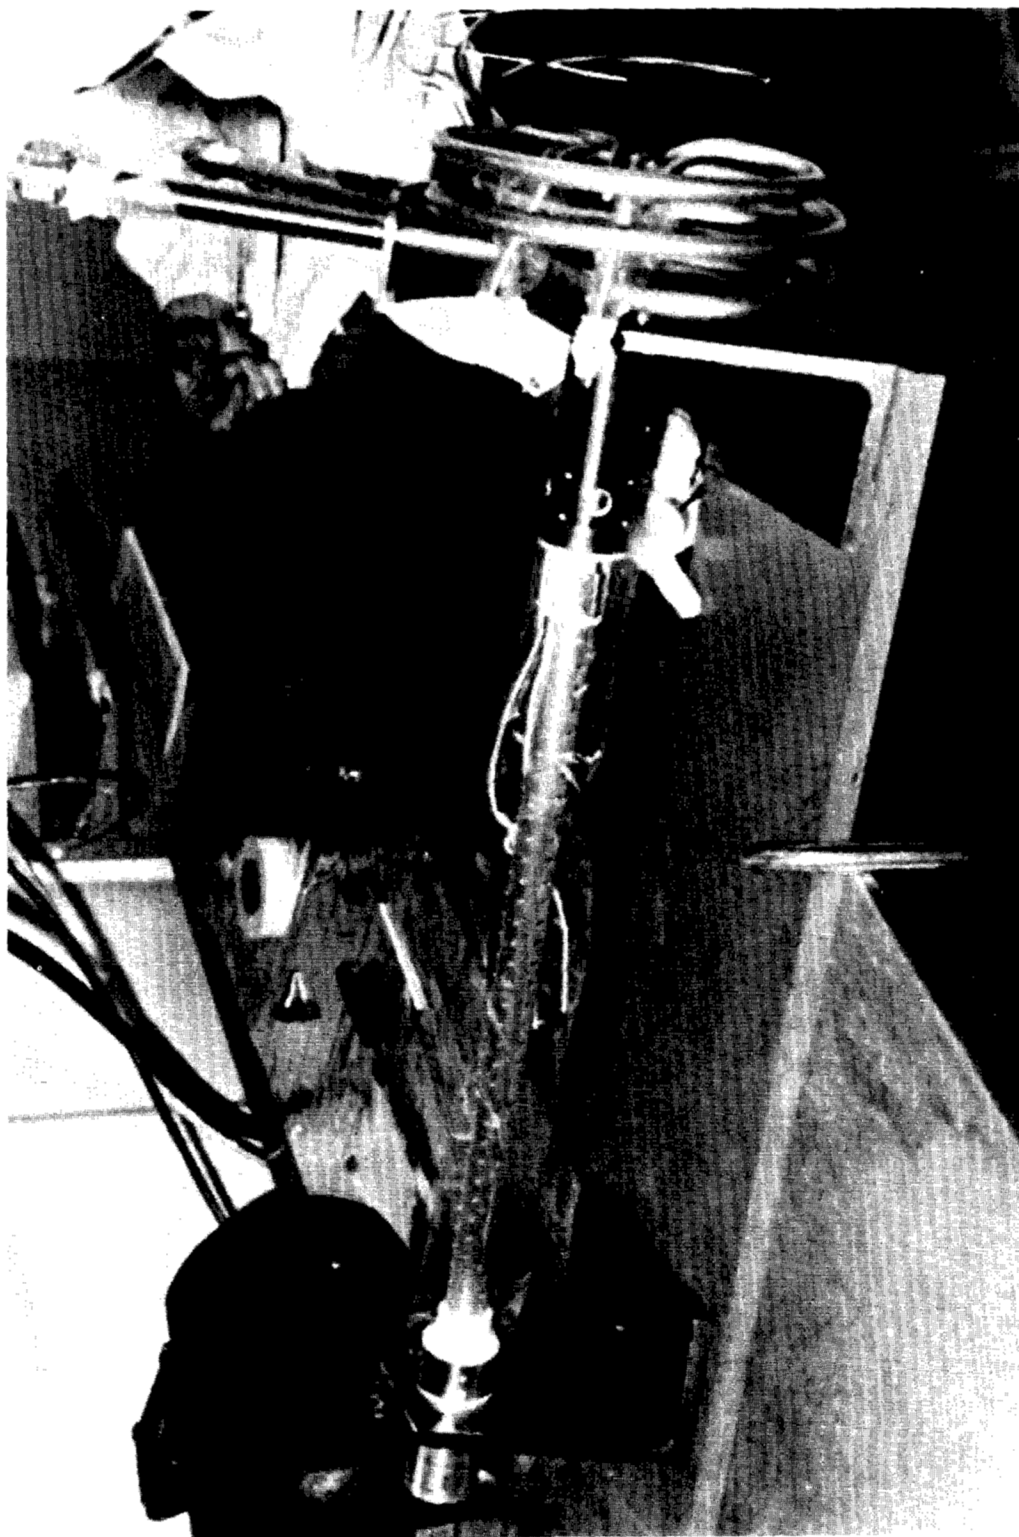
Quantity probe and coil assembly in welding jig.
